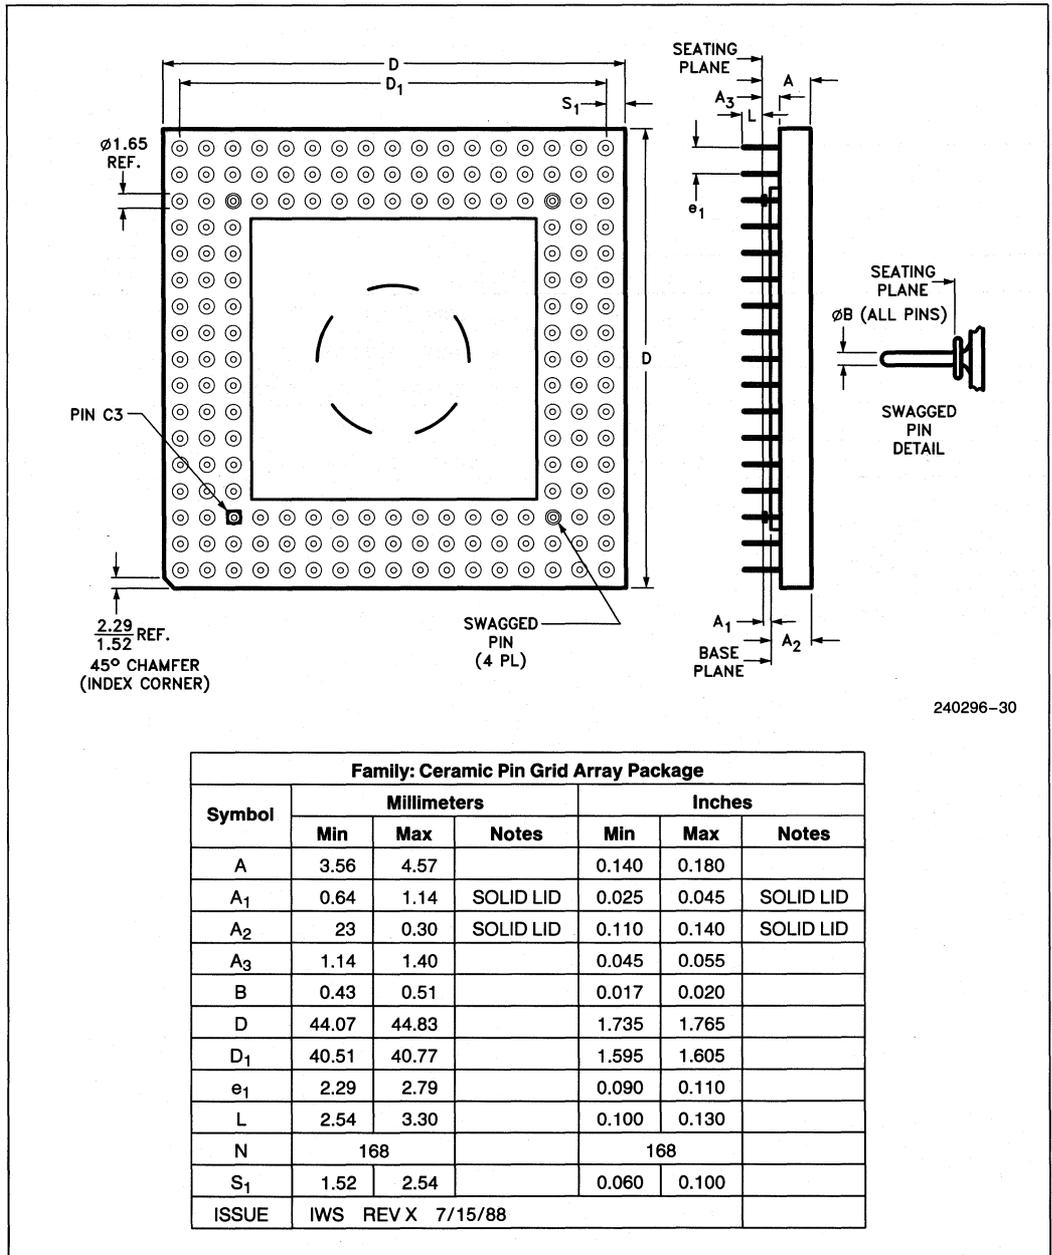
168 Lead Ceramic PGA Package Dimensions
